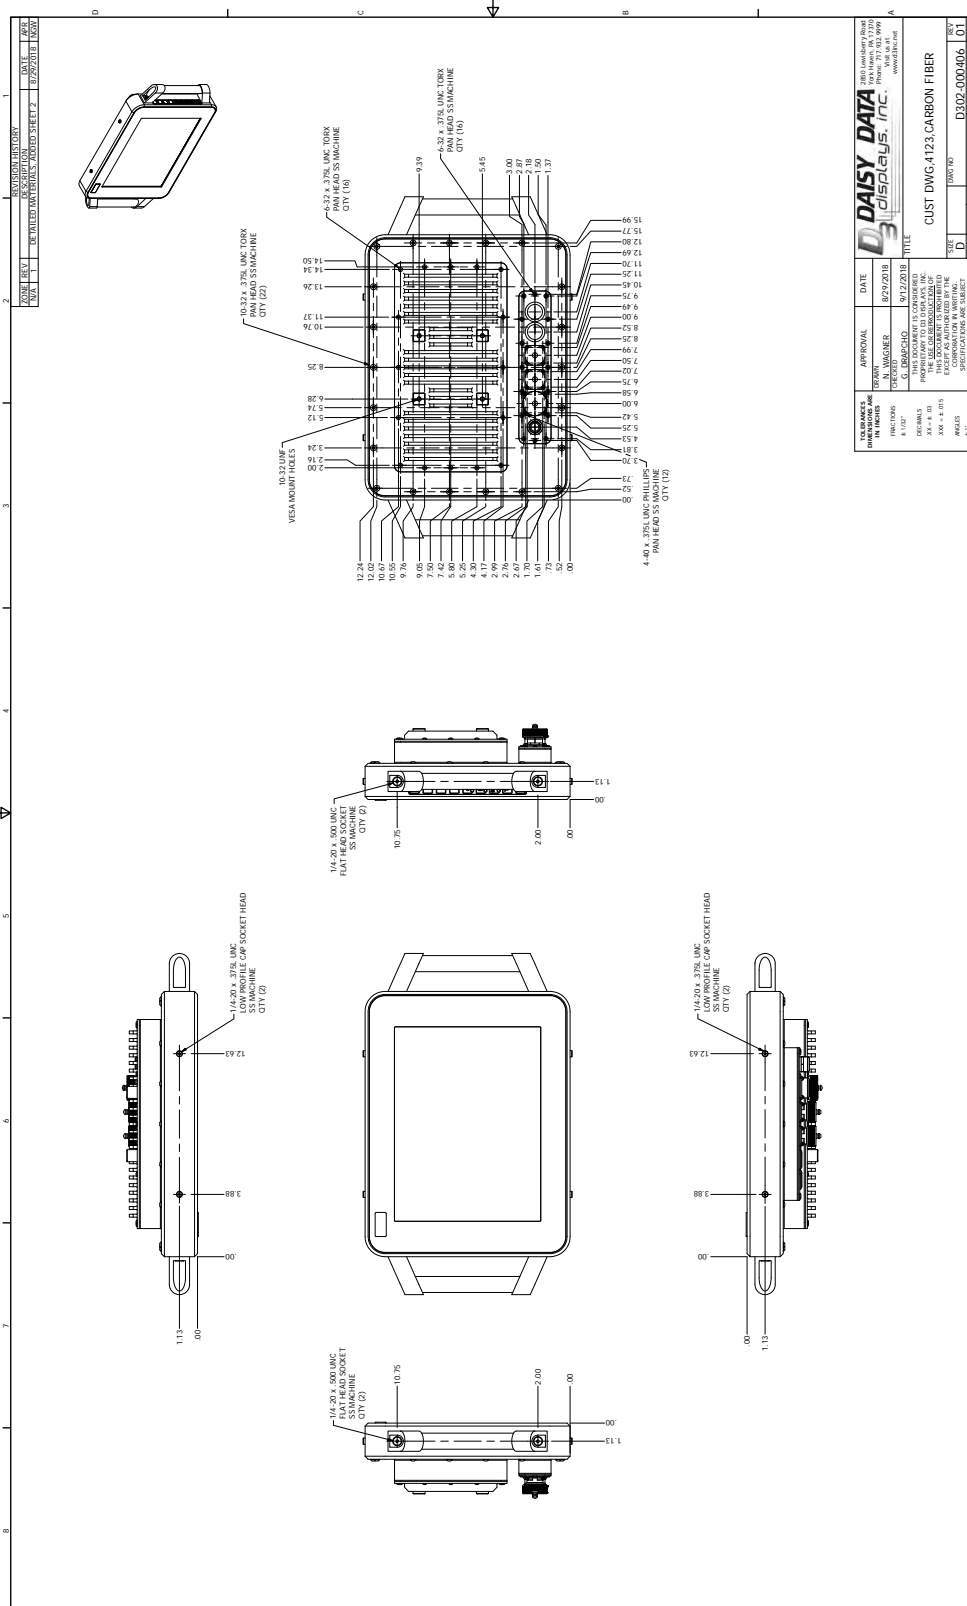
Model 4123 Mechanical Drawing (2 of 2)
